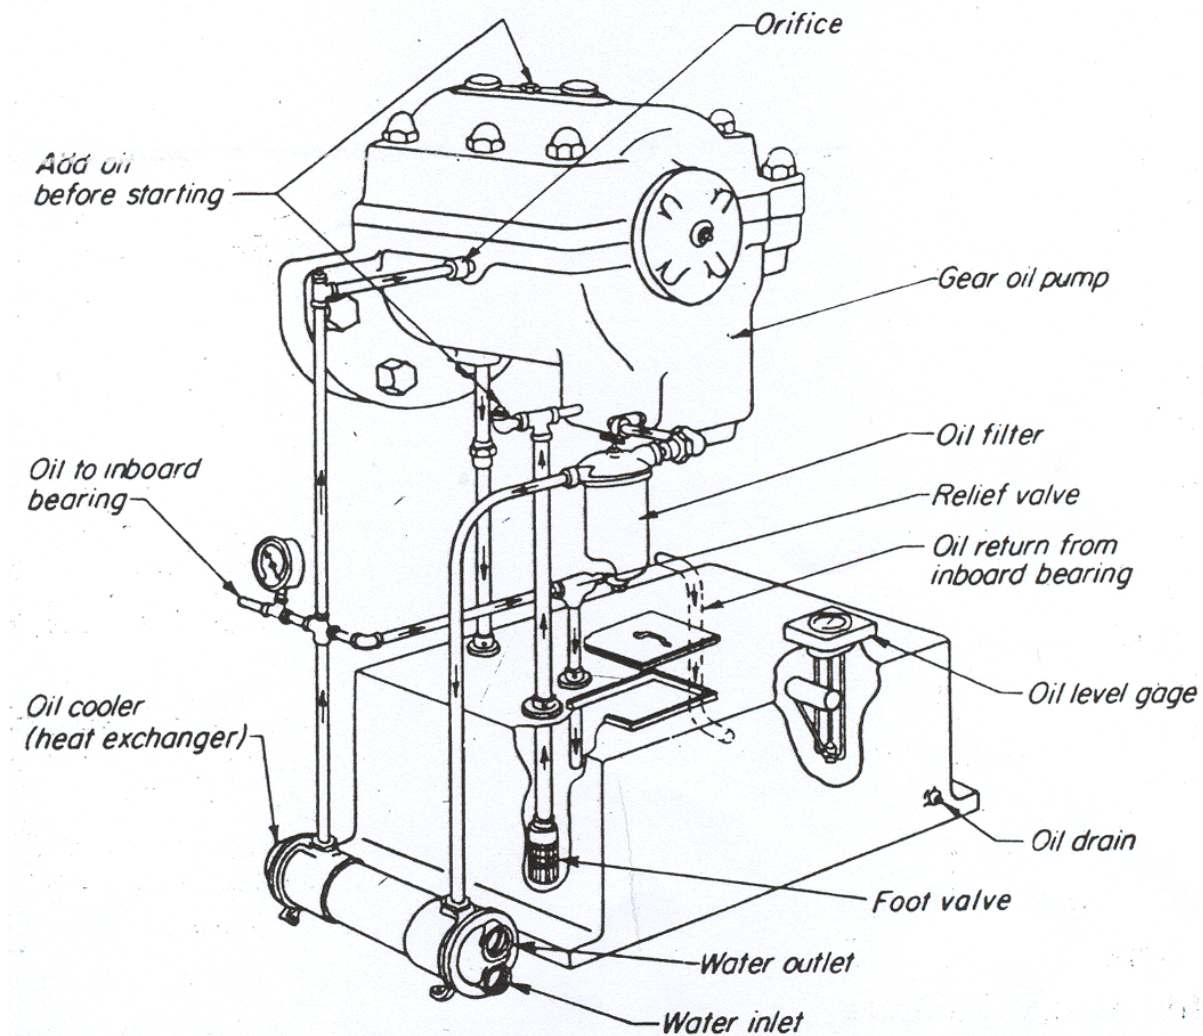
Typical forced lube-oil system. (Courtesy of Ingersoll – Rand Co. )
